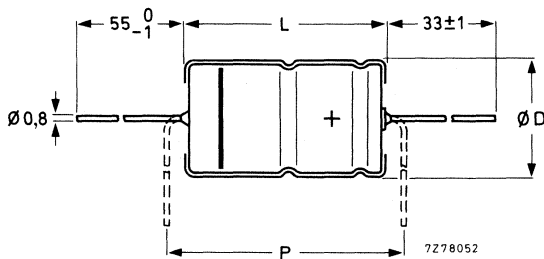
Case sizes 00, 01, 02 and 03. For dimensions D, L and P, see Table 1.
